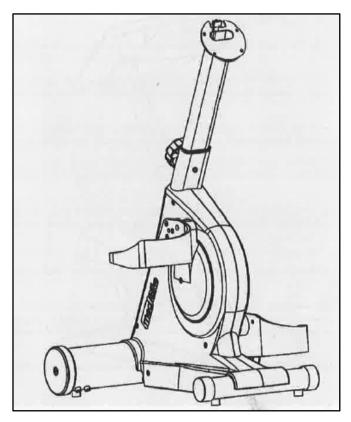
Handlebars stem tube--secured in pedal/arm crank/motor assembly.
